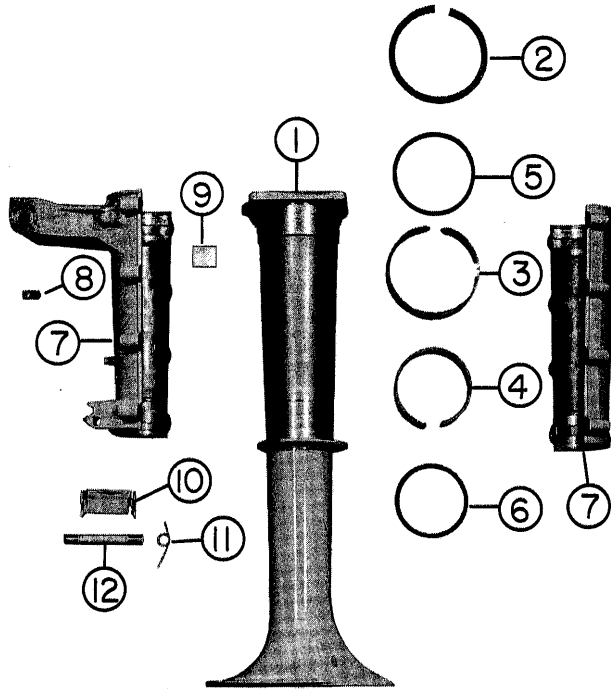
A – MODEL JW, JH-19 AND UP – EXHAUST HOUSING GROUP
